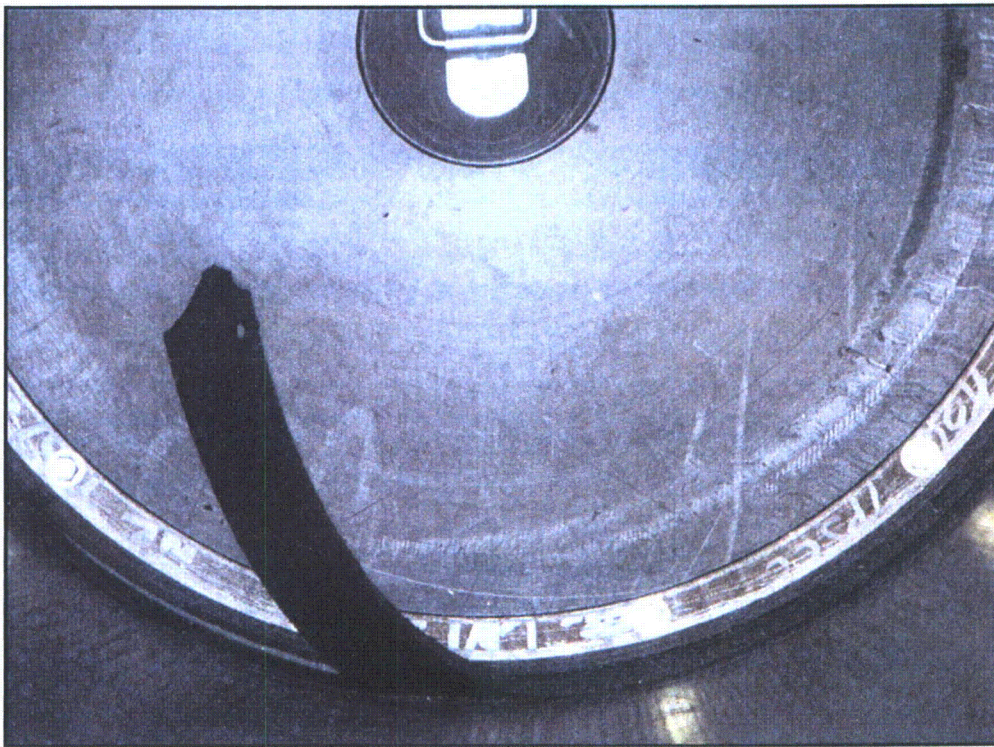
View of NS30 #2 Bottom End Cap from the Lid End of the Shield Body Pipe (close-up of torn gasket)
